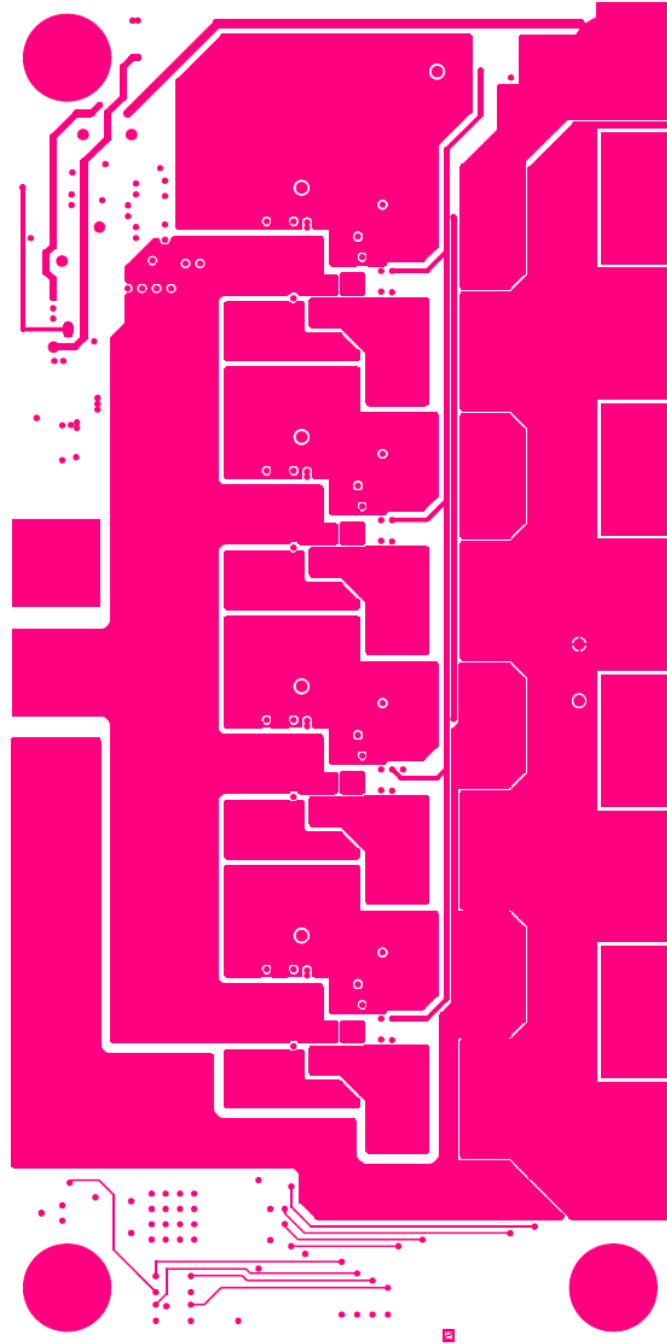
PCB design of inner layer1 corresponding to the test board of Figure G.3.1.
